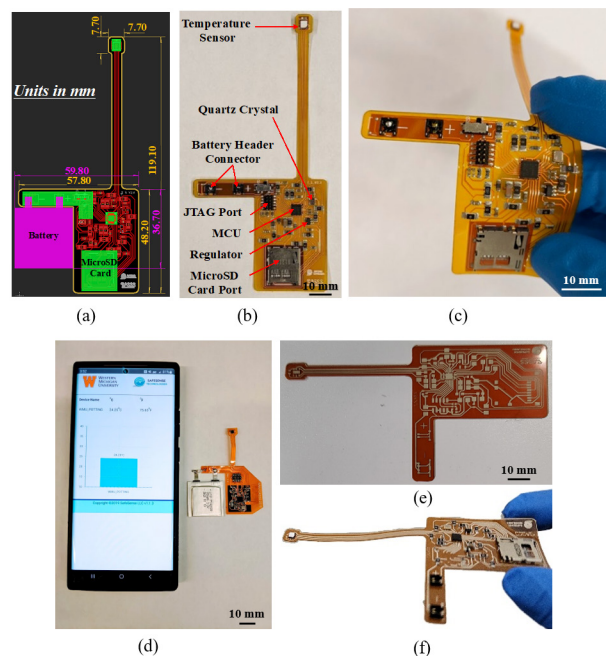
(a) CFS and PFS layout dimensions, (b) fabricated CFS prototype with soldered component, (c) flexible CFS prototype, (d) wireless CFS with Android™ app, (e) printed PFS, and (f) fabricated PFS prototype.
